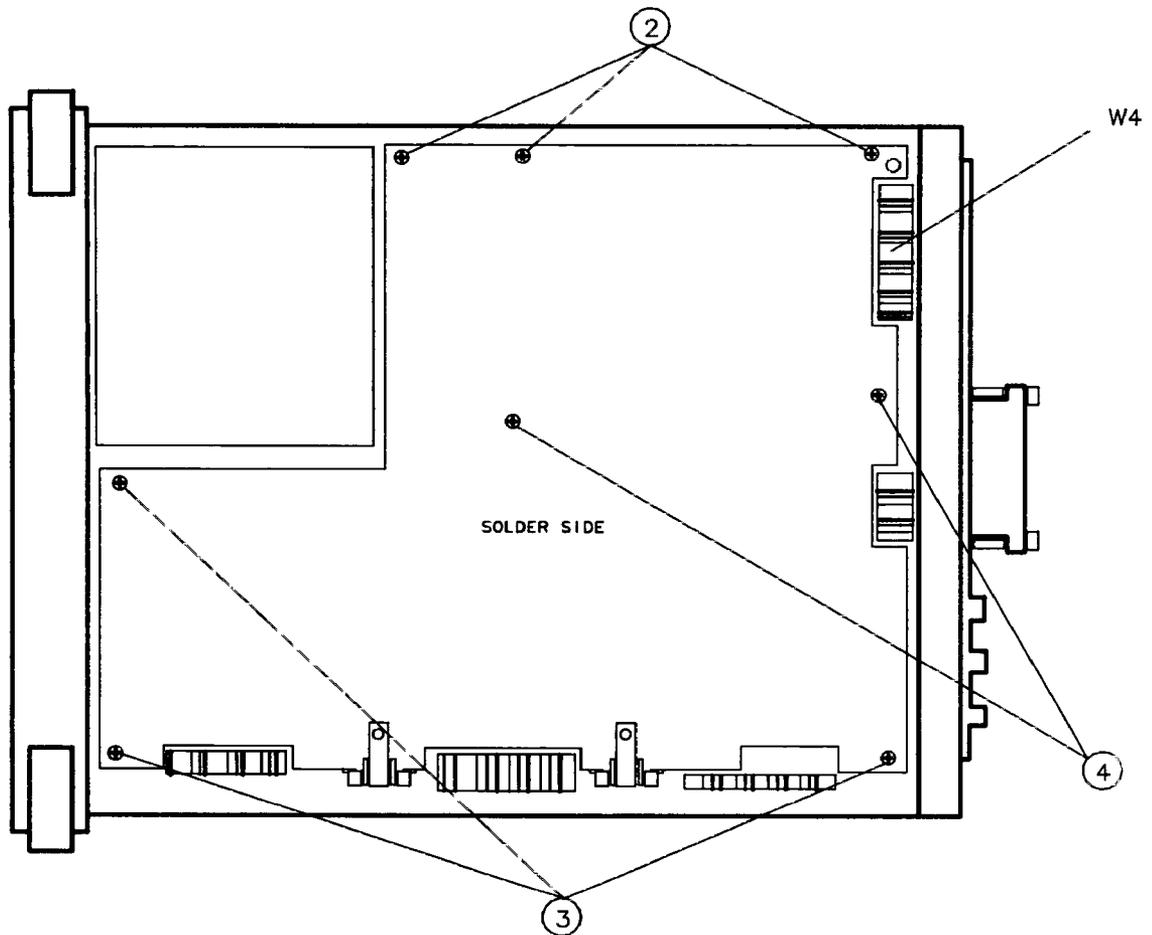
A2, A3, A4, and A5 Assembly Removal
